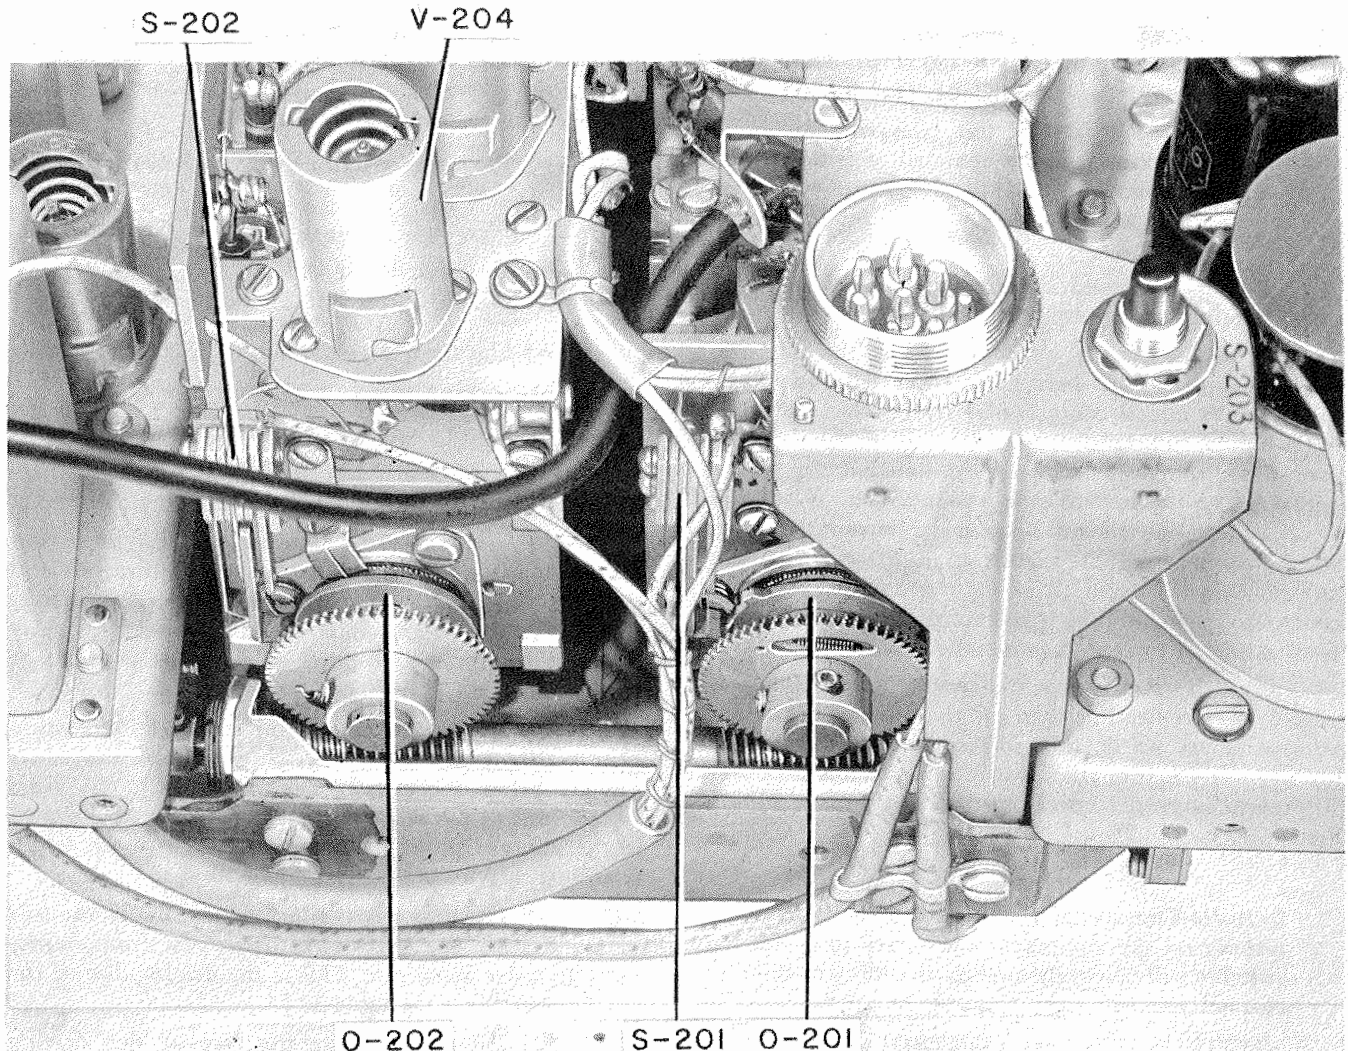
Radio Receiver—Showing Variable Capacitors, Drive Shaft, Cams, and Switches
